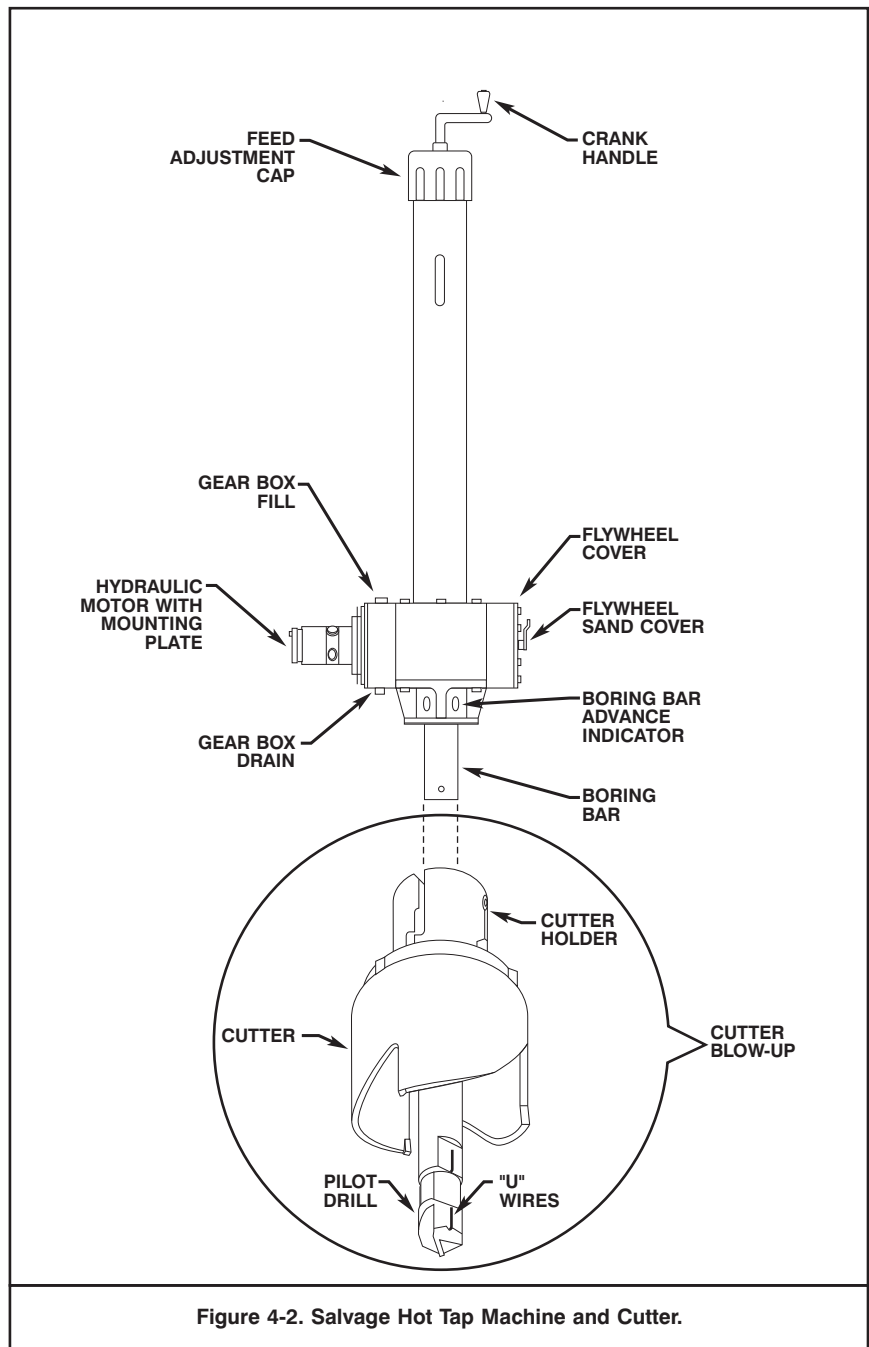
Salvage Hot Tap Machine and Cutter.
